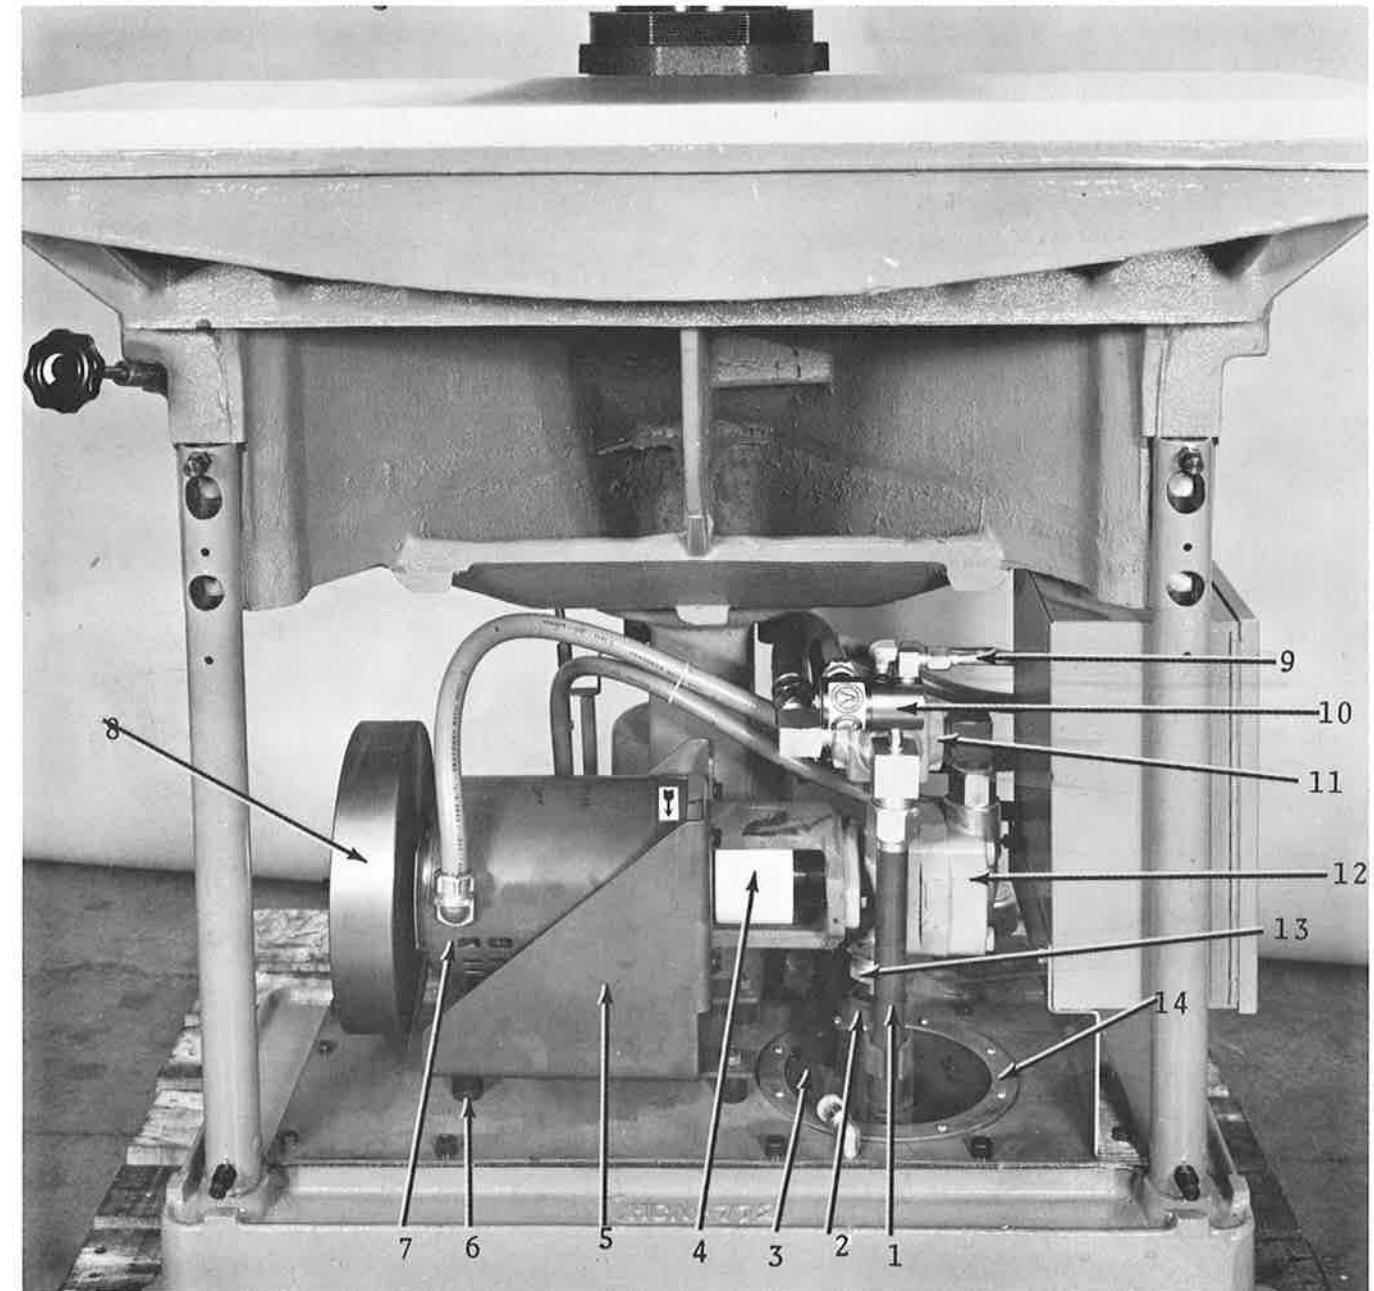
HCM-B2 - Hydraulic Unit - Front View
